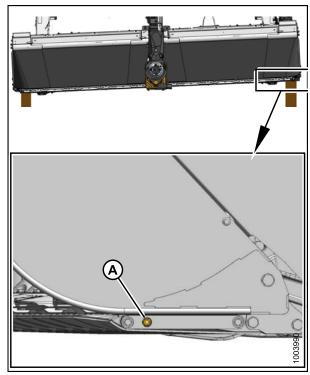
Tilted Mower Conditioner and Cutterbar Filler Plug
